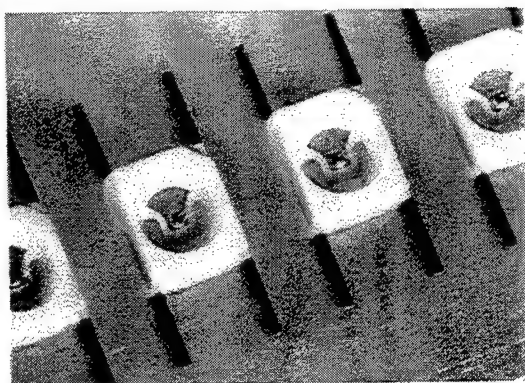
Premoulded SMD-LED upon reel after wire bonding.
